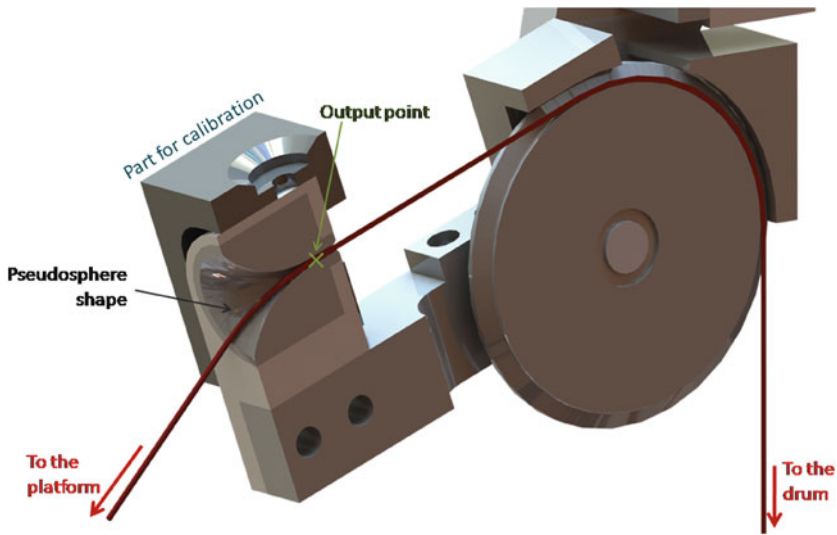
Cut CAD view of the eyelet in the pulley assembly showing the elements of the eyelet
